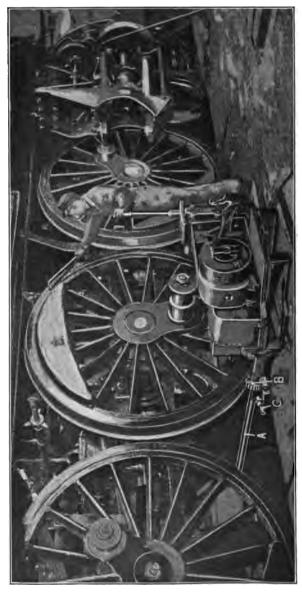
Motor driven machine for rotating drivers for valve setting.
